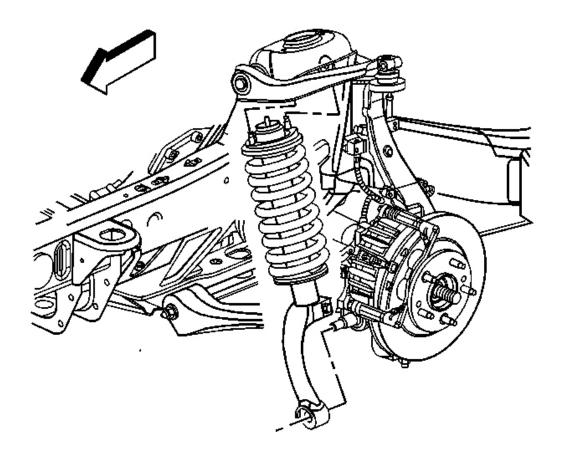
Removing/Installing Shock Module Courtesy of GENERAL MOTORS CORP.
